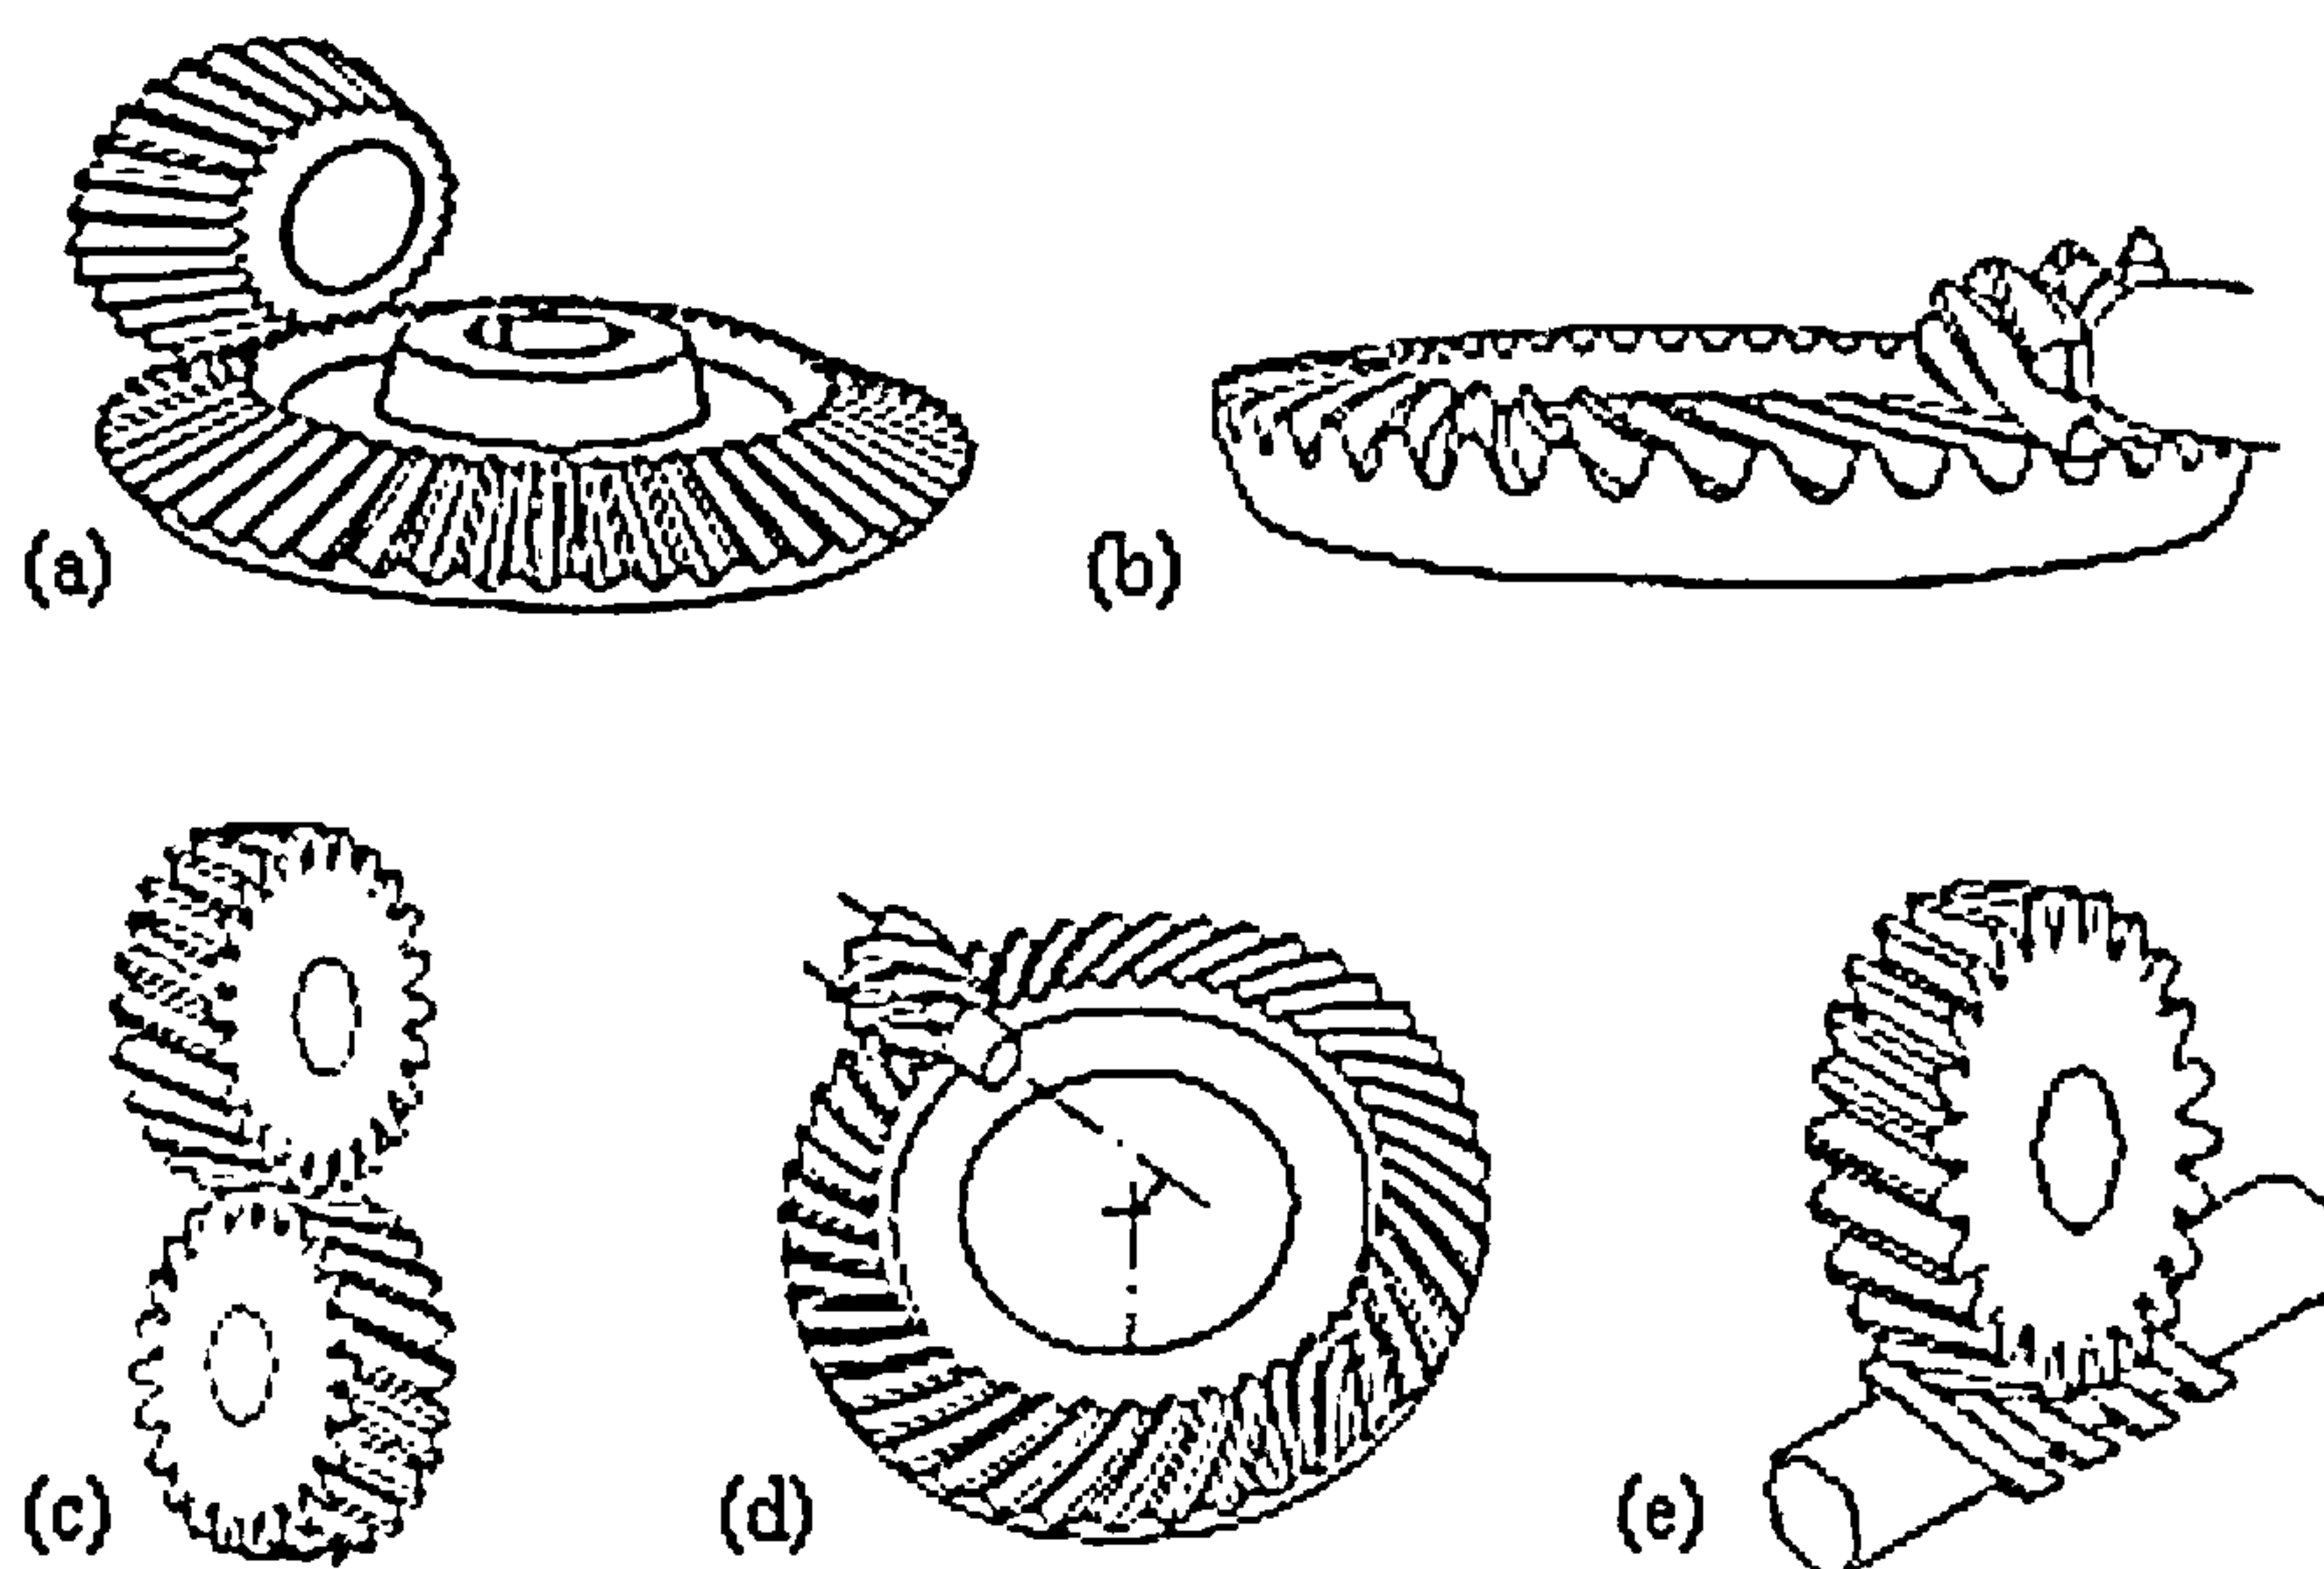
Gears with non-parallel axes: (a) straight bevel gears, (b) spiral bevel gears, (c) crossed helical gears, (d) hypoid gears and, (e) worm gears.
